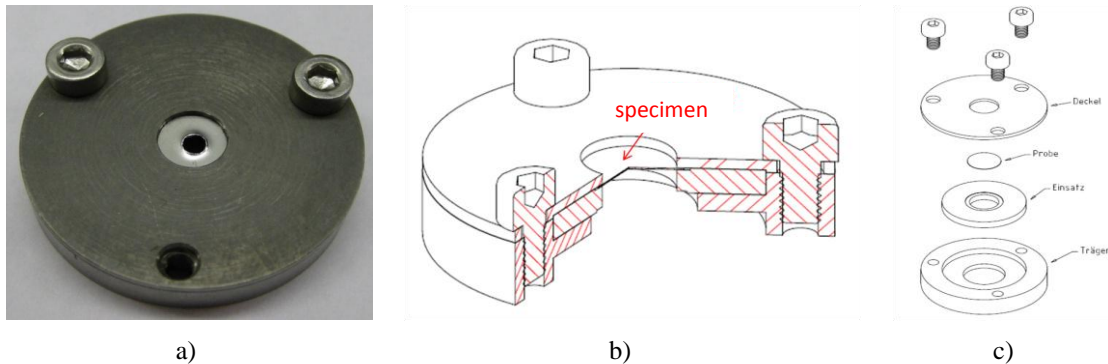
a) photo of the holder with a laser melted niobium specimen. b) cross section of the specimen holder. c) “exploded” drawing.
